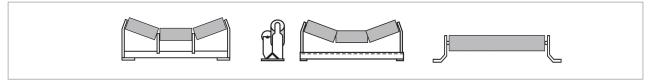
Three types of idlers well-suited for conveyor belt scales.
